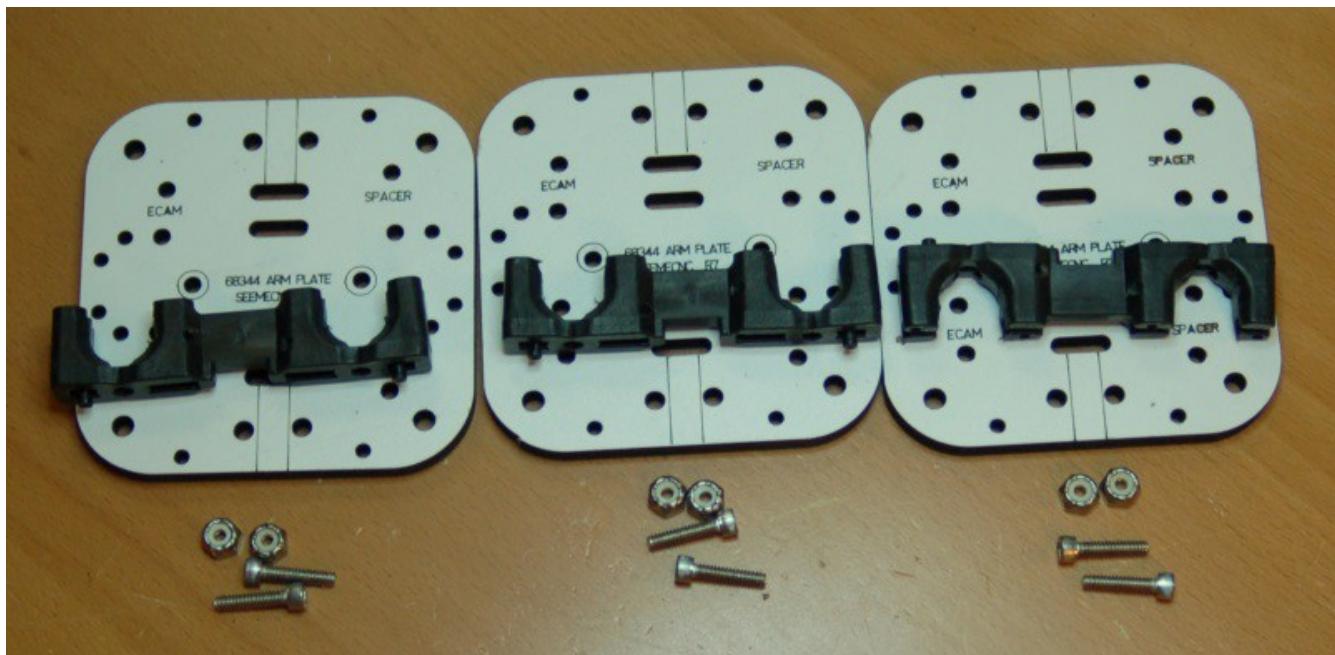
Carriage U-Joint mounts and mounting hardware ready to go.
